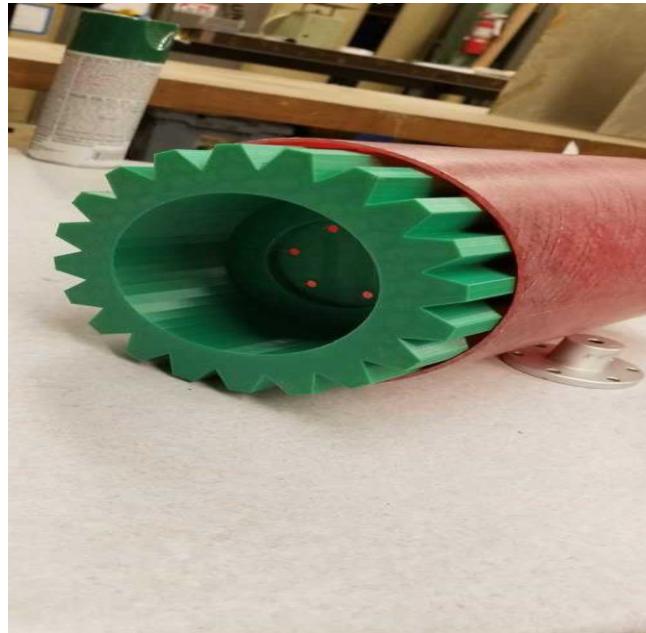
Test fitting our old wheel design in our 6" airframe, wheel is 3D printed PLA.
